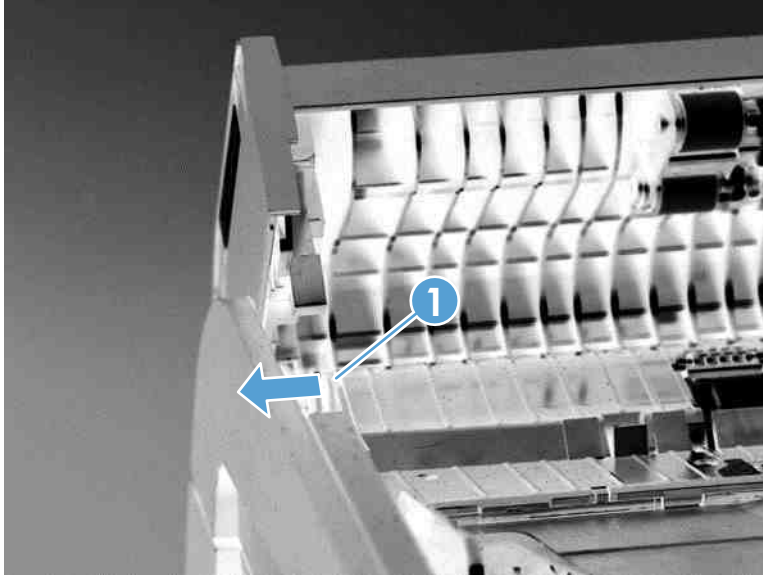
Remove the document feeder core assembly (4 of 4)
